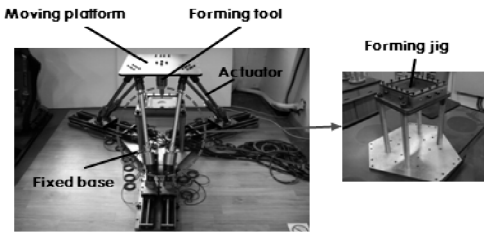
Developed dieless forming machine based on Parallel-type Robot
